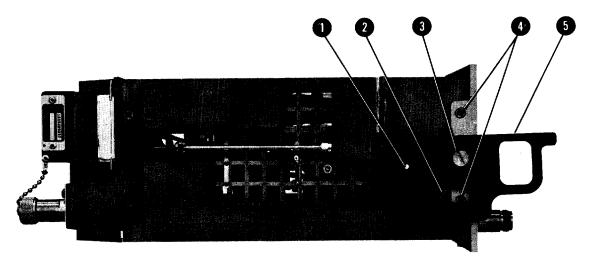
Band Indicator Lamp Replacement (1 of 2)
